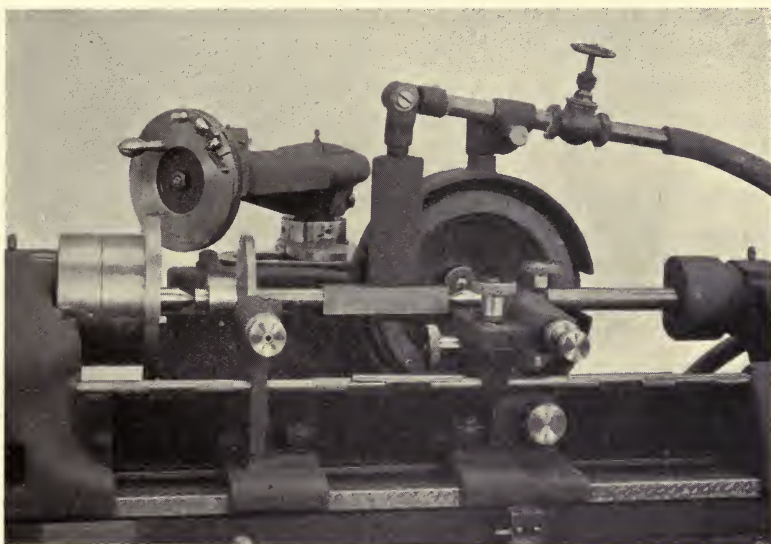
GRINDING SQUARE SHAFTS—LANDIS
